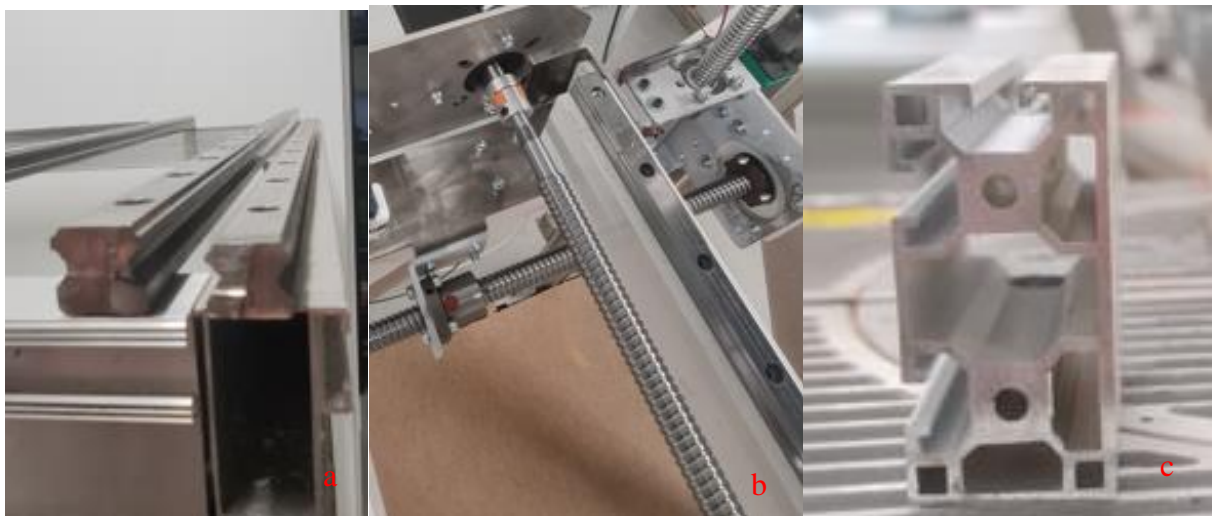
A- HGR25 and HGR22 linear rails, B- Ball screw, C- Aluminium extrusion
